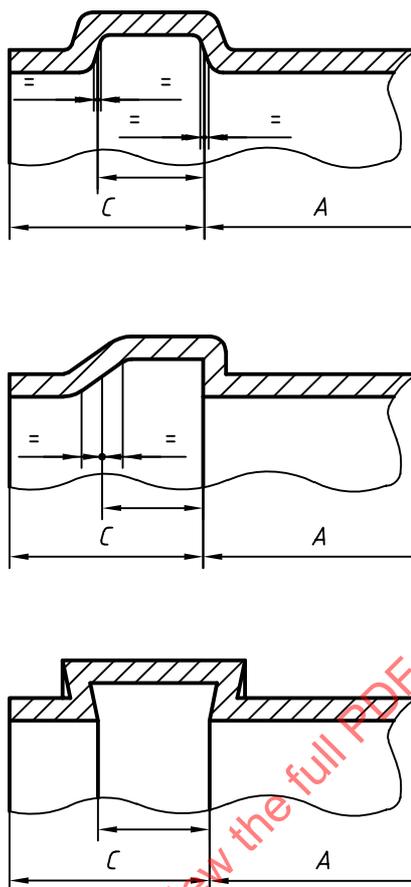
Typical groove designs for elastomeric ring seal sockets
